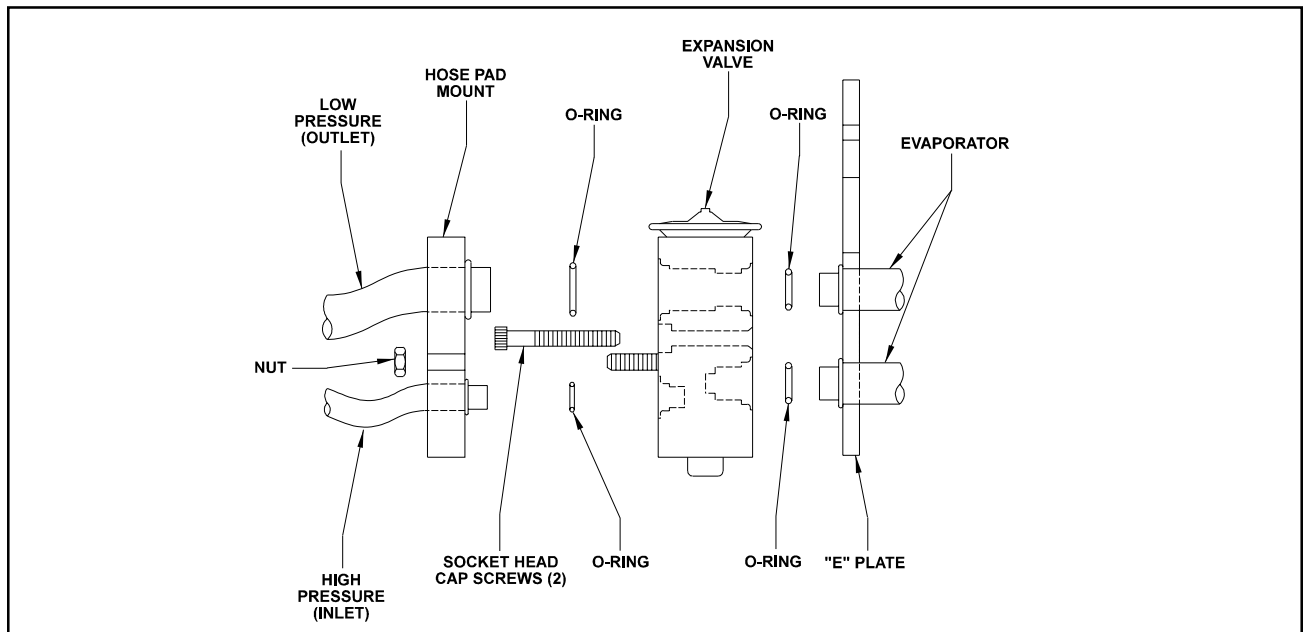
Pad Fitting Assembly (Sleeper Unit)
